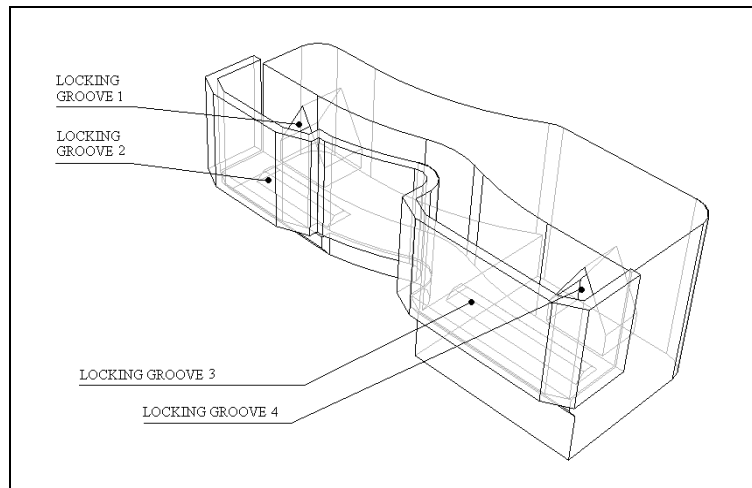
Locking cavities were built into the battery spring to ensure that the metal component did not detach from the major component.
